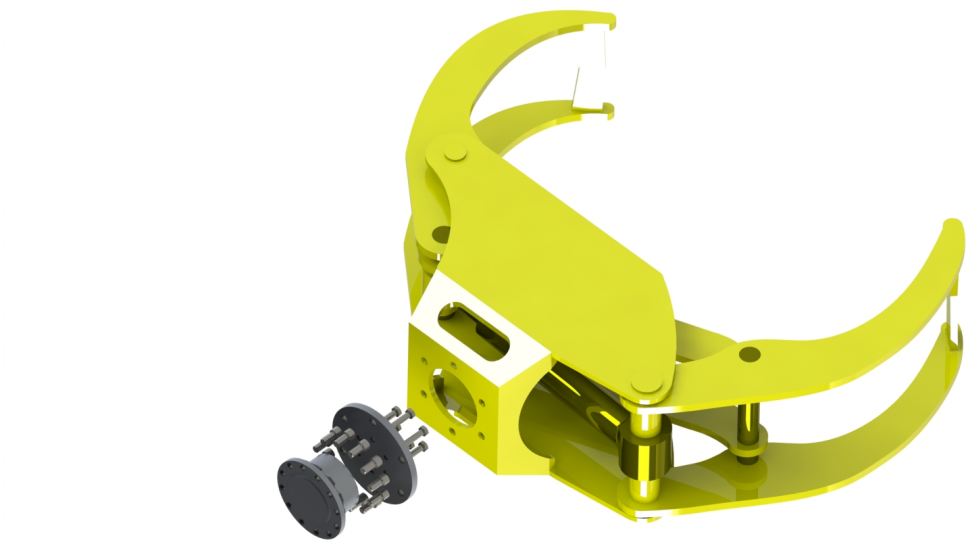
Exploded view of link 7 with the end-effector tooling Vahva B15
